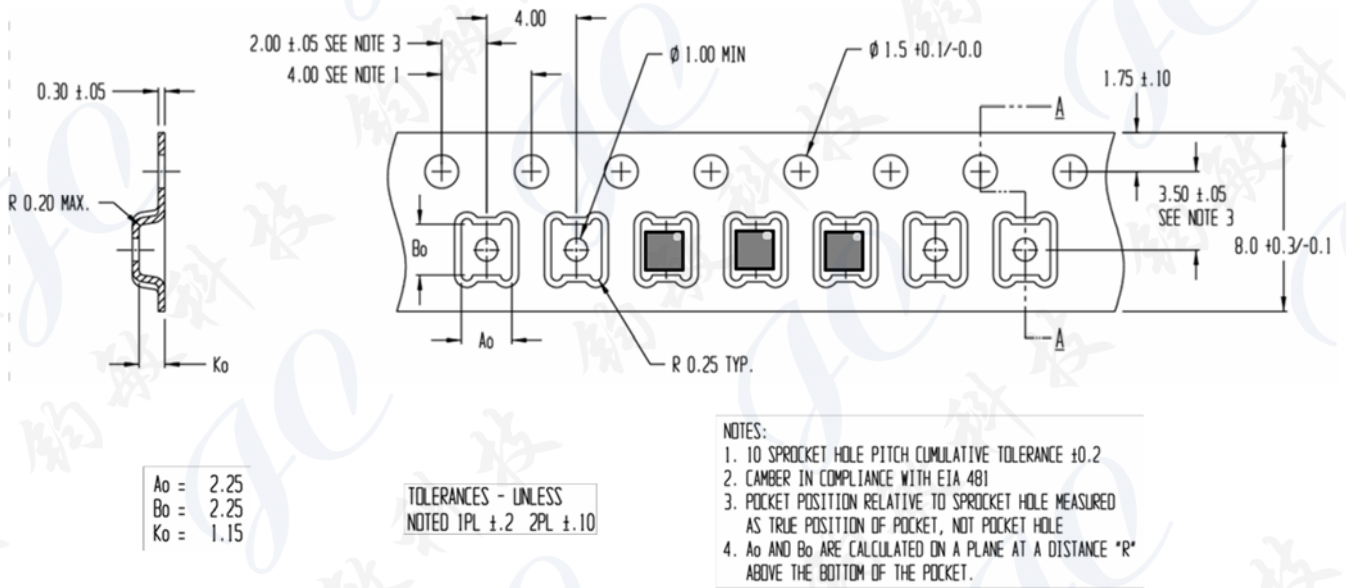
Technical drawing of the packaging tape with sensor orientation in tape. Header tape is to the right and trailer tape to the left on this drawing. Dimensions are given in millimeters.
